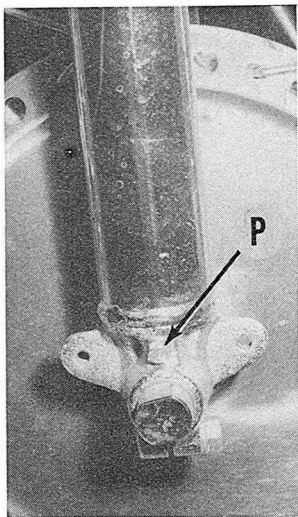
Front suspension units are drained by removing plug (P), then compressing and releasing forks.
